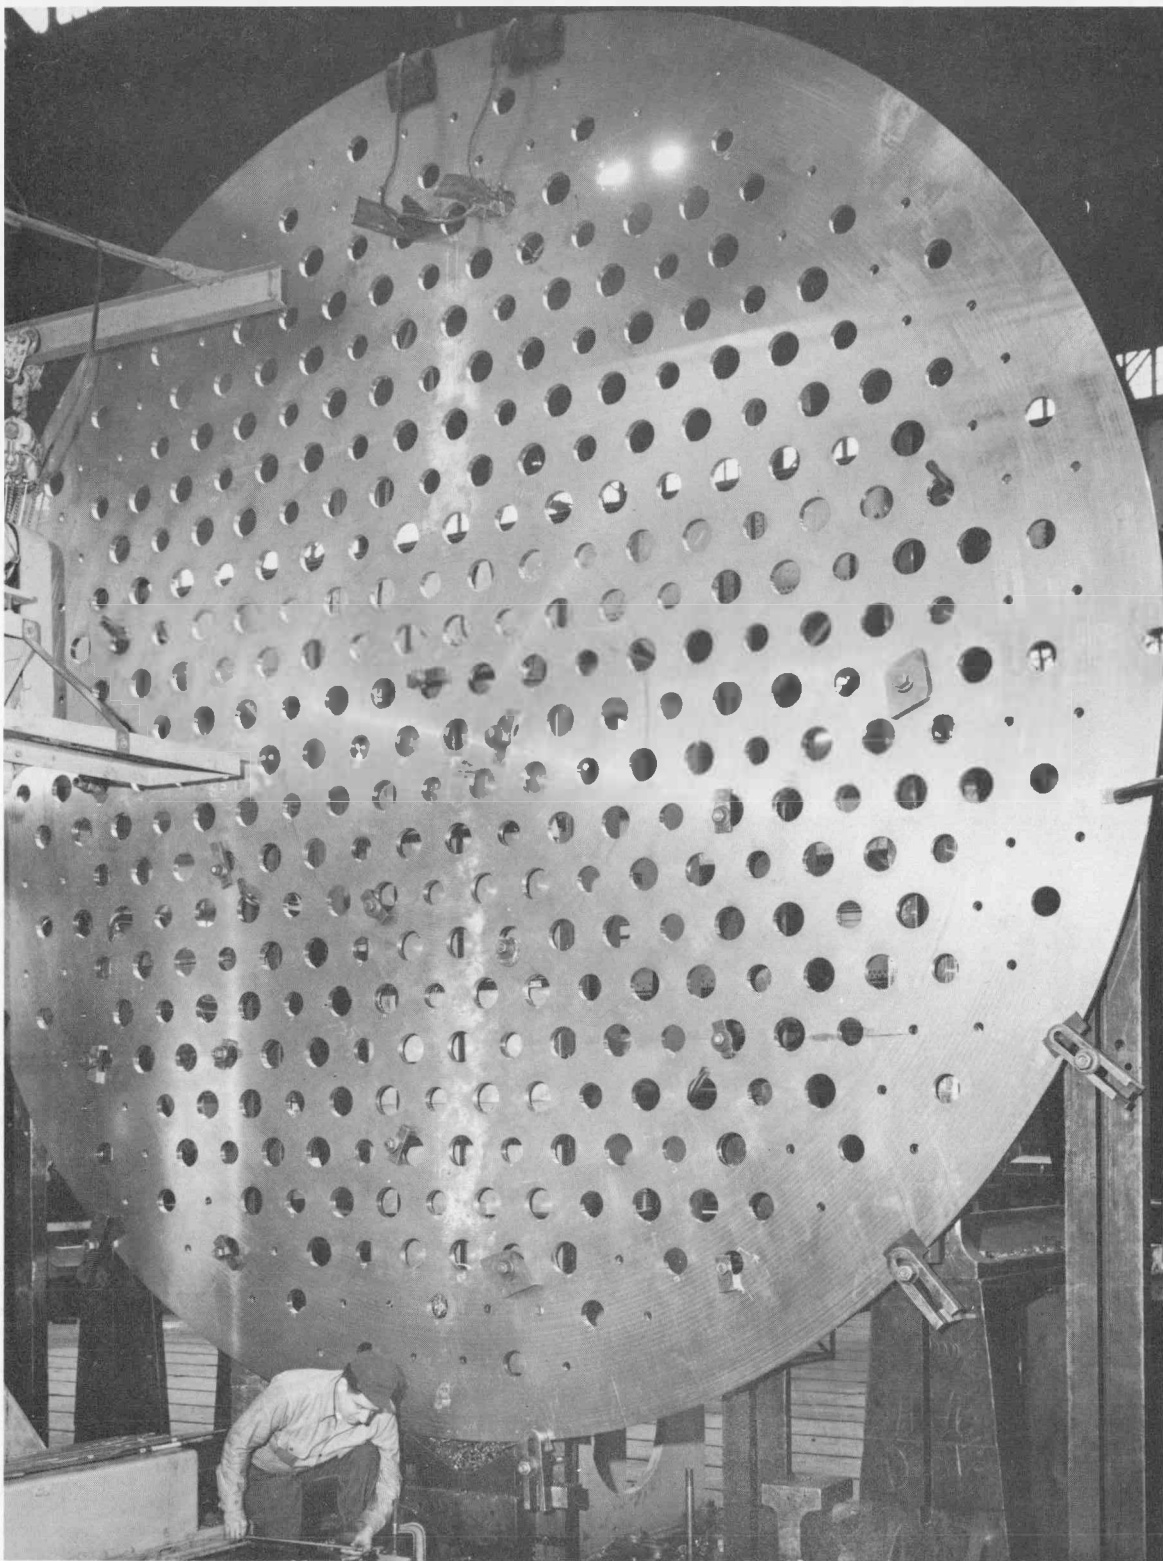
Grid Plate, Finished to 1-in. -Thick, Type 304 SS (Shown at horizontal boring mill for machining of holes for the fuel element and moderator can supports)
